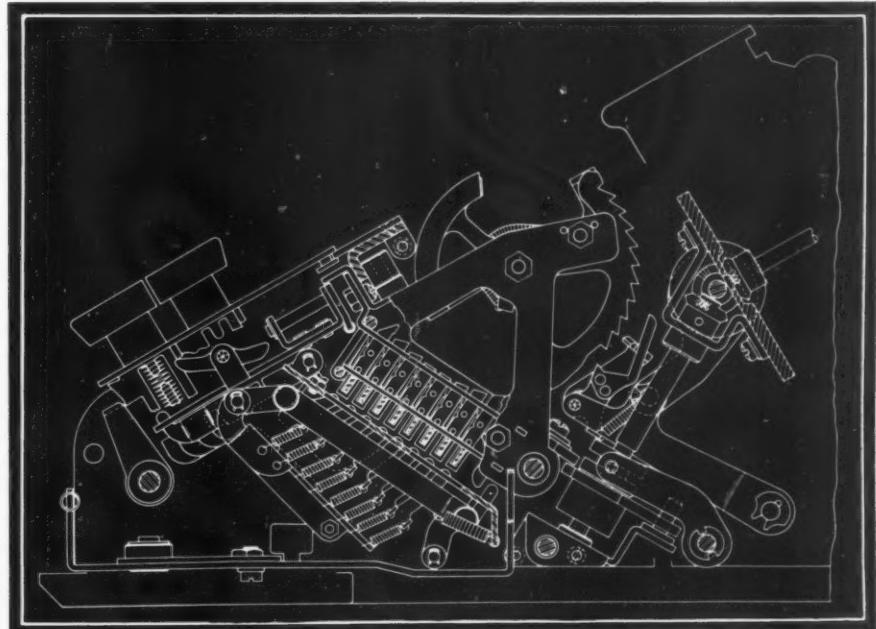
Right—Close juxtaposition of operating units provides compact machine
